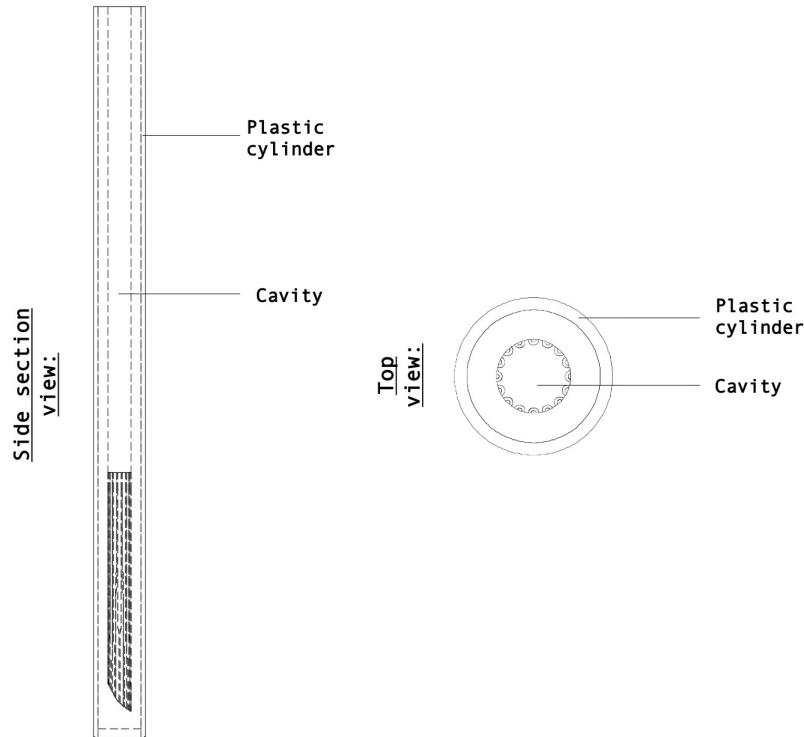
Side section and top view of the negative mould within the plastic cylinder
